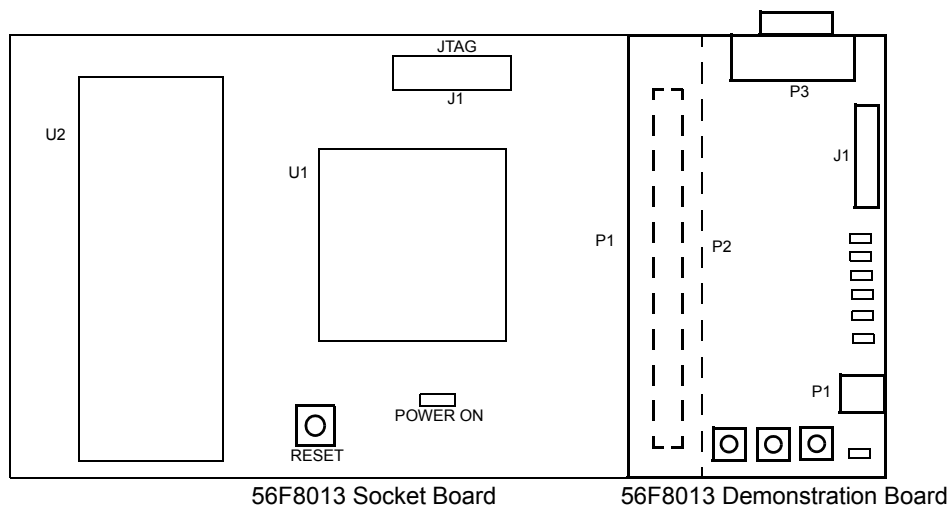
Connecting the 56F8013 Socket Board & 56F8013 Demonstration Board
